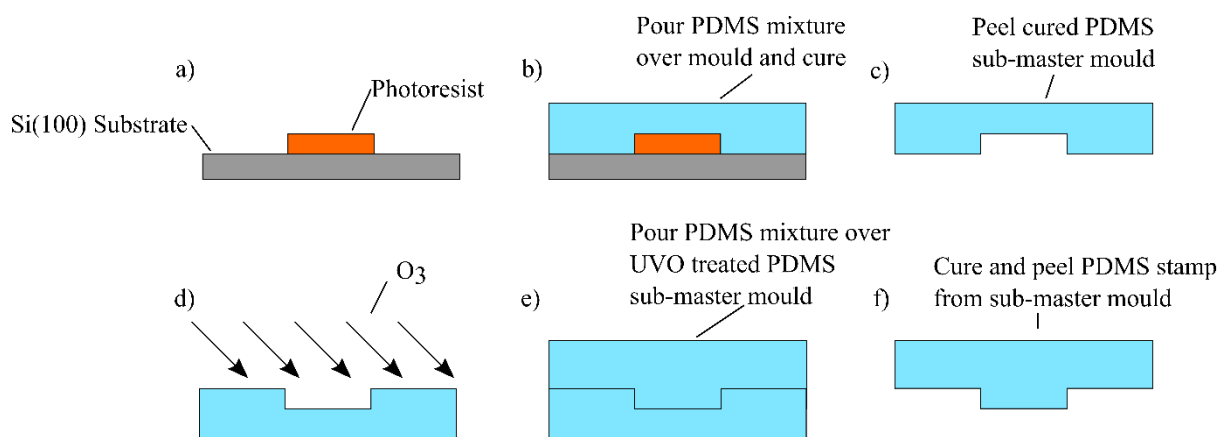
Schematic showing the stages involved in casting and treating a PDMS double cast sub-master mould followed by the secondary casting of the PDMS stamp from the sub-master mould. A) the preparation of the photoresist on Si(100) master mould, b) pouring and curing the mixed PDMS mixture that will form the sub-master mould, c) peeling the sub-master mould away from the Si(100) master mould, d) Ultraviolet/ozone (O₃) treatment of the PDMS sub-master after cleaning with isopropyl alcohol, e) After 24 hour wait time, fresh PDMS mixture is poured over the sub-master and cured, f) finally the PDMS stamp is peeled from the PDMS sub-master mould in preparation for use.
